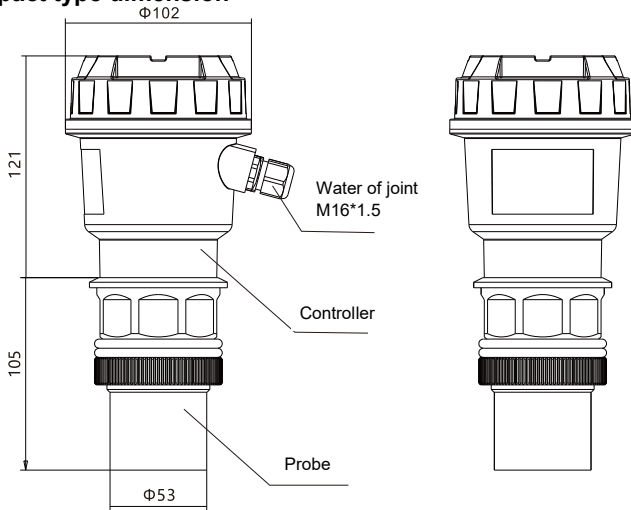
M60×2 or G2 Thread Sensor (5m/10m)
